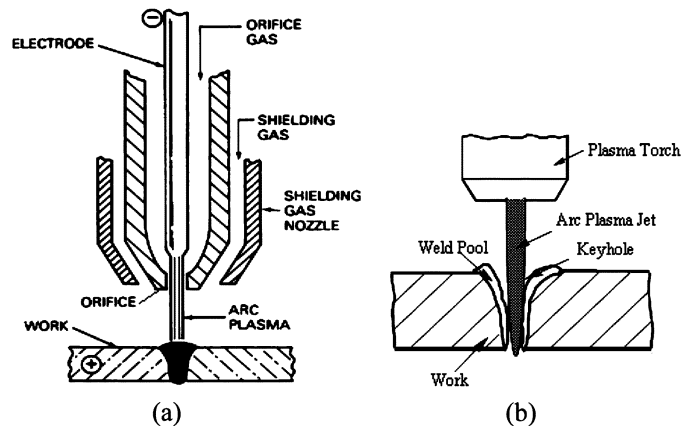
Illustration of PAW torch and keyhole: (a) PAW Torch and (b) Keyhole.
